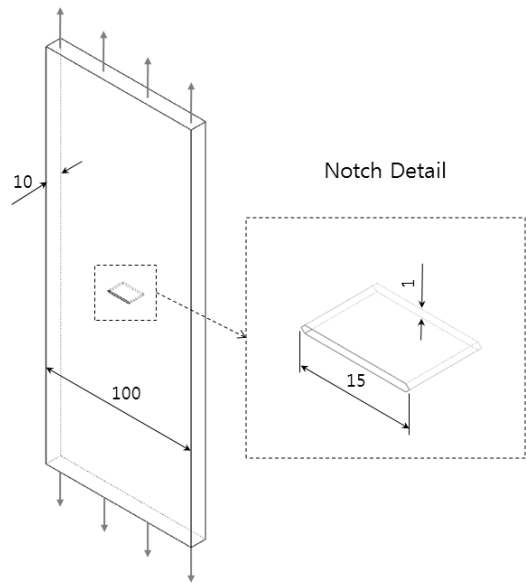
Center Cracked Plate Tension Specimen(CCT)
